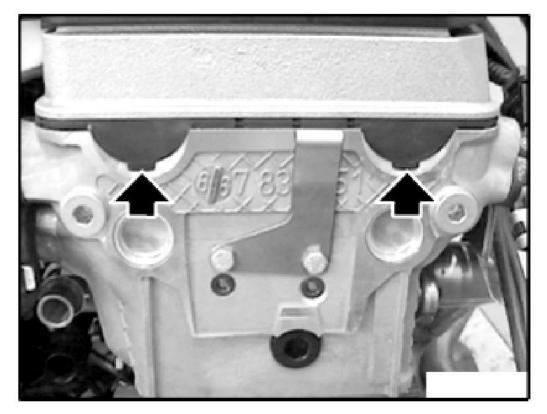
Identifying Cylinder Head Cover Gasket Guide Pins Courtesy of BMW OF NORTH AMERICA, INC.
